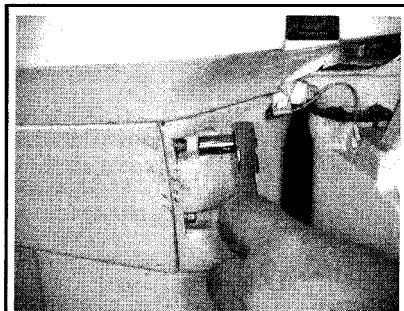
Remove the exhaust housing covers for access to the powerhead-to-exhaust housing retainers
